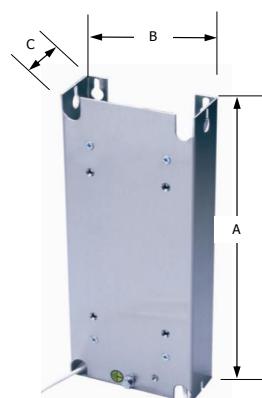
Dimensions of chassis and footprint mains filters SK HLD 110-500/xx and SK LF2-480/xxx-F
